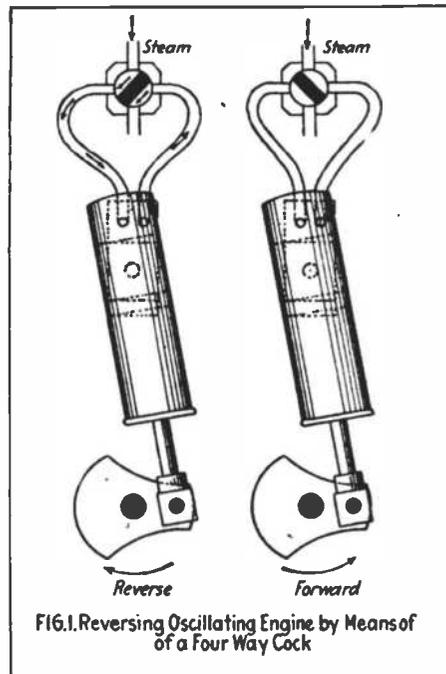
Reversing Oscillating Engine by Means of a Four Way Cock
